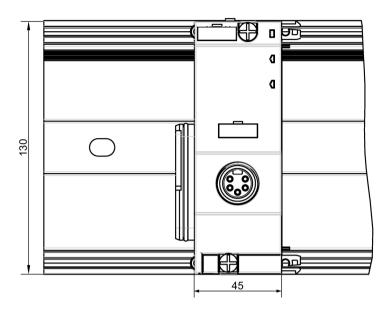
Dimensional drawing of the power module with CM PM ECOFAST connection module
